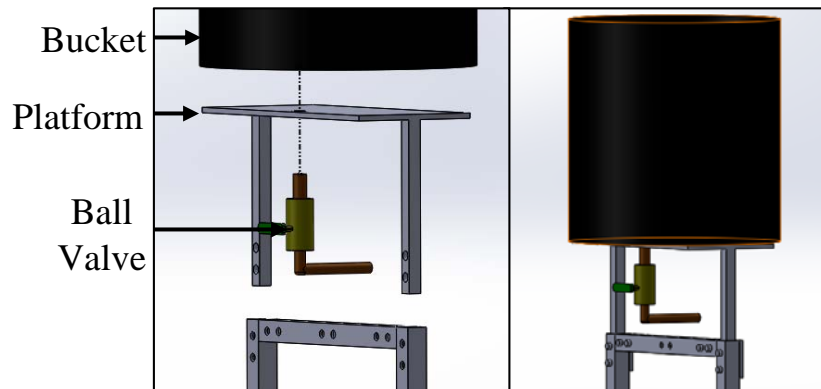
Assembly of the storage tank. Left, shows the alignment of the components. Right, shows the assembly of the storage tank
